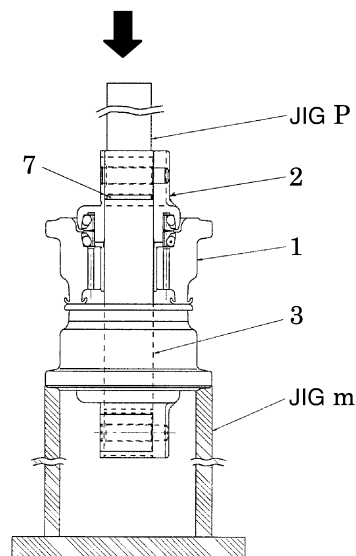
Removing shaft (3), collar (2), O ring (7)
